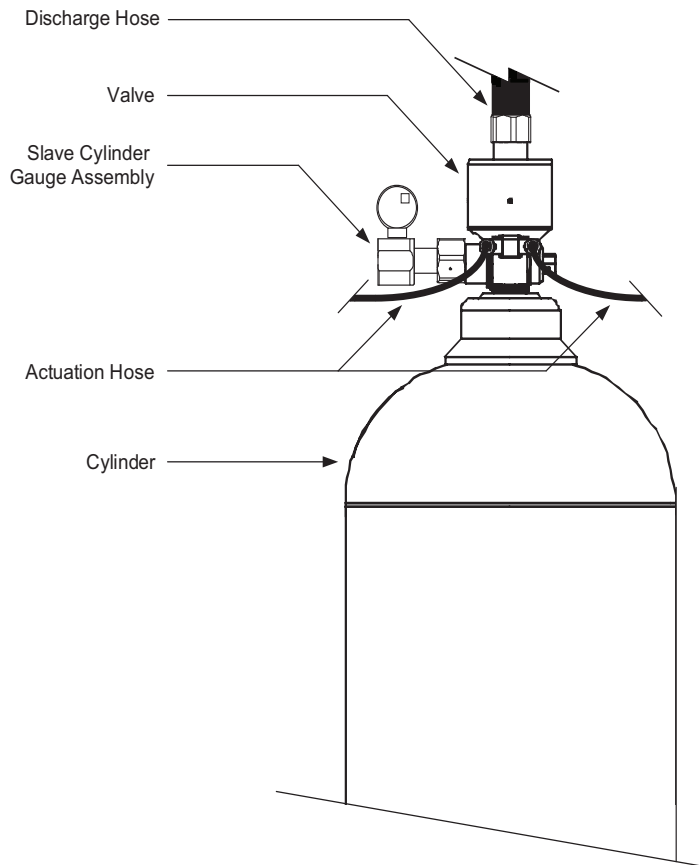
Typical Slave Cylinder/Valve Assembly (Rear View)
